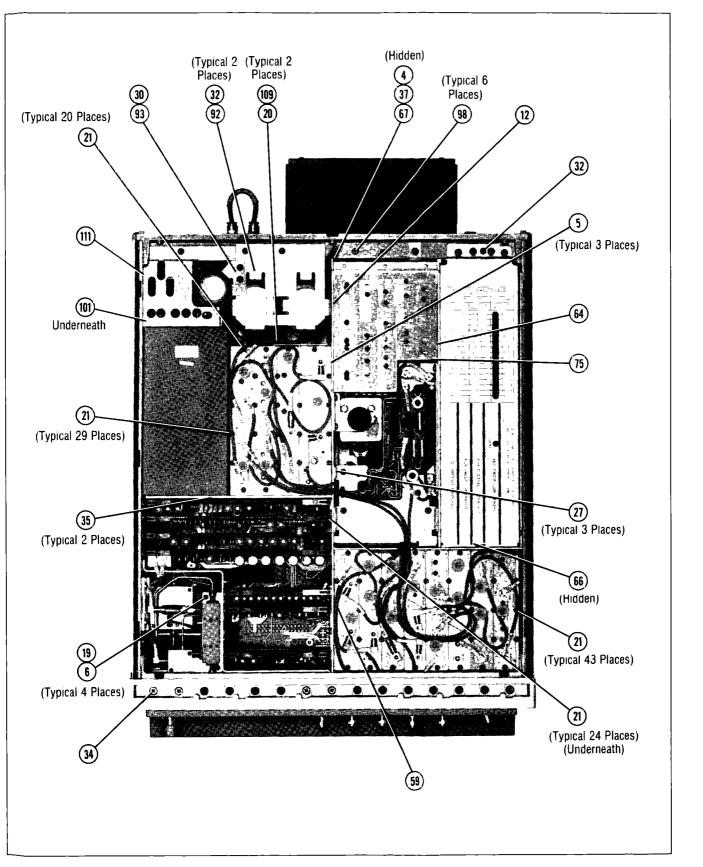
Miscellaneous Mechanical & Chassis Parts (4 of 6)
